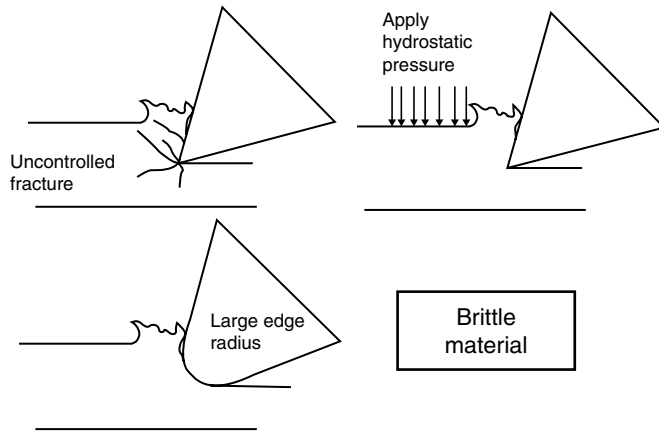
Controlled fracture is necessary to machine brittle materials
